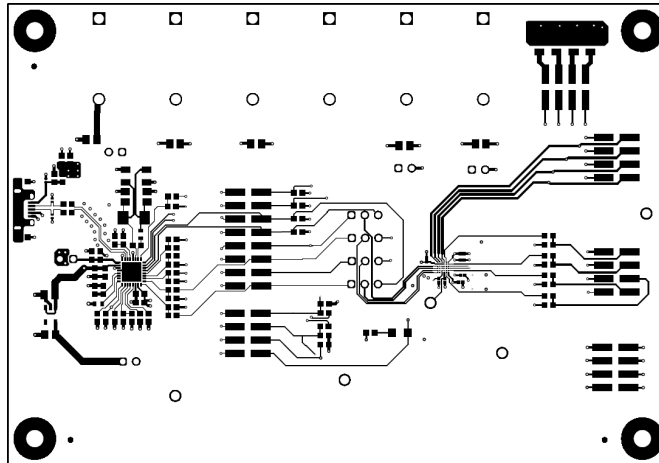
AMC6V704EVM PCB Top Layer Layout
